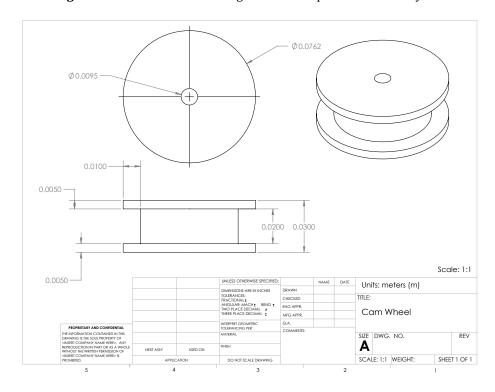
The above drawing depicts the cam wheel in SolidWorks.
